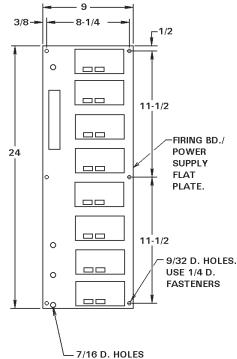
Input/Output Assembly mounting detail
